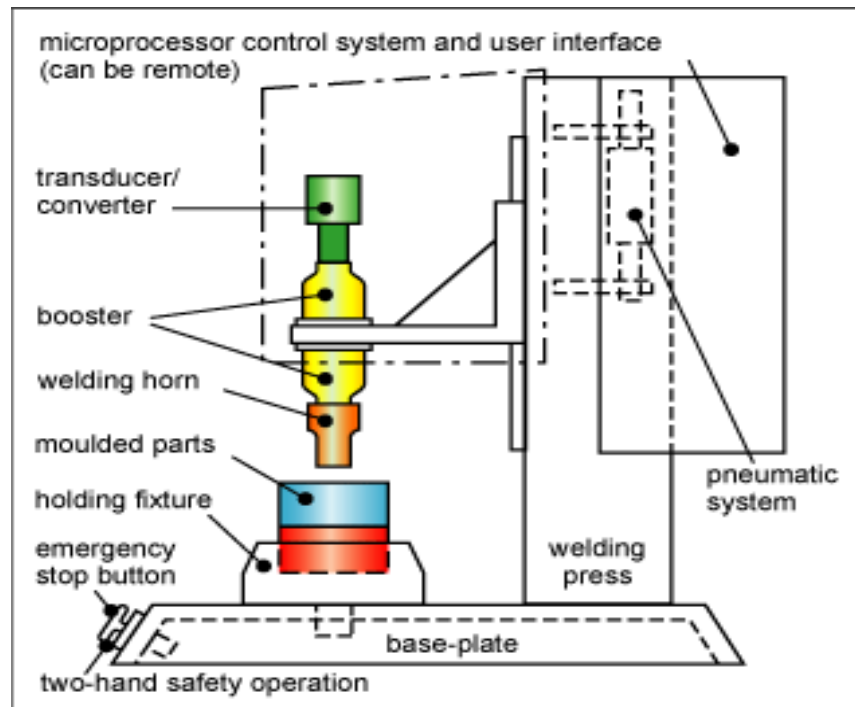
Example of ultrasonic welding rig. A pneumatic actuation is depicted at the back of the unit, used to move the ultrasonic assembly into contact with materials to be laminated. Due to the complexity of the ultrasonic tooling, this actuator can be placed under the lower “anvil” tooling for simplicity.
